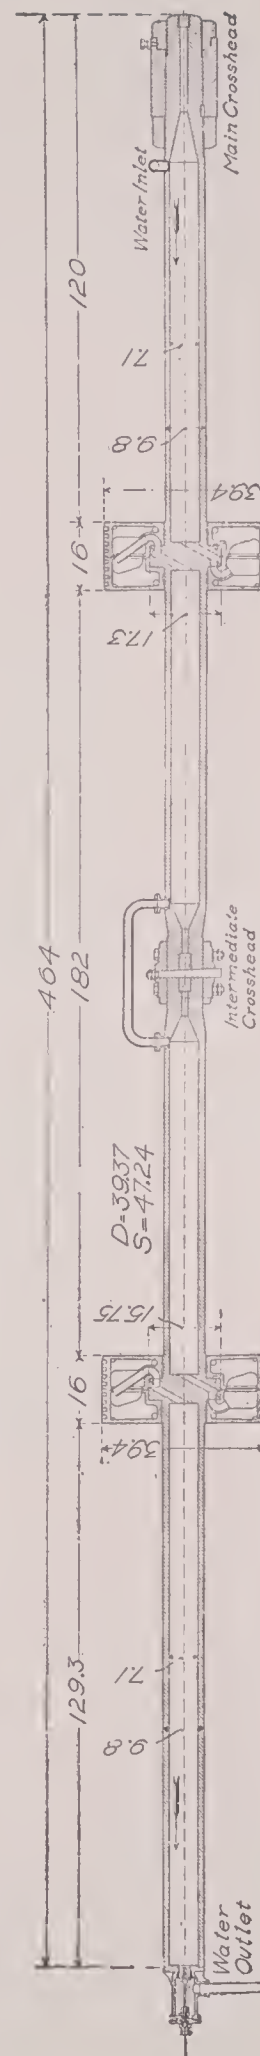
Piston and Rod for a 1200 H.P. Double-acting 4-cycle Simplex Tandem Engine. (Assembly Drawing in Part III.)
